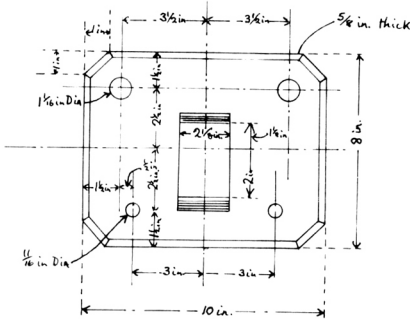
DRAWBAR PLATE (1907 SPECIFICATION)
